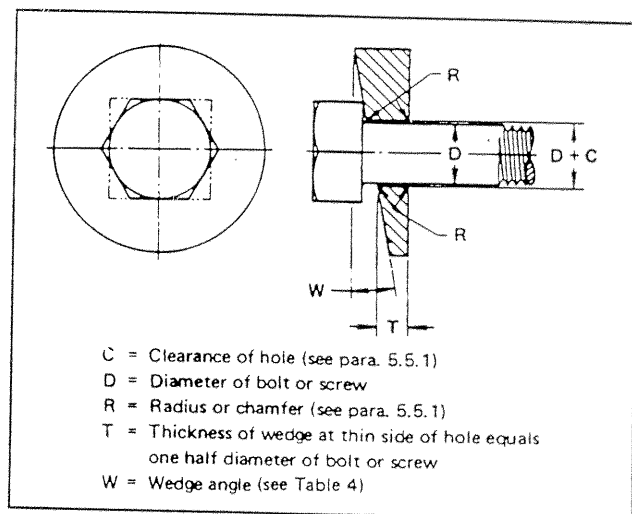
TENSILE TEST DETAILS FOR BOLTS AND SCREWS
